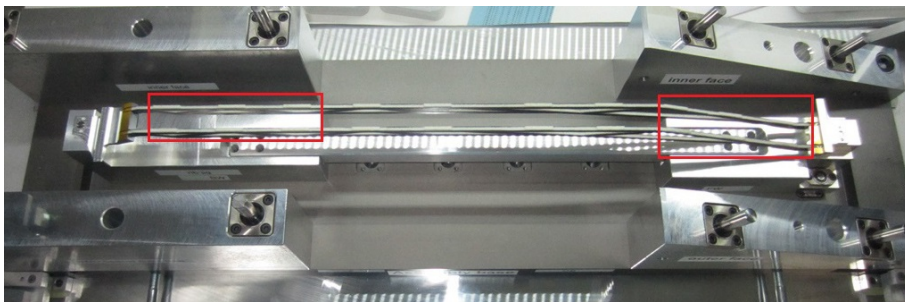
Rib jig, forward and backward spacers on assembly base
